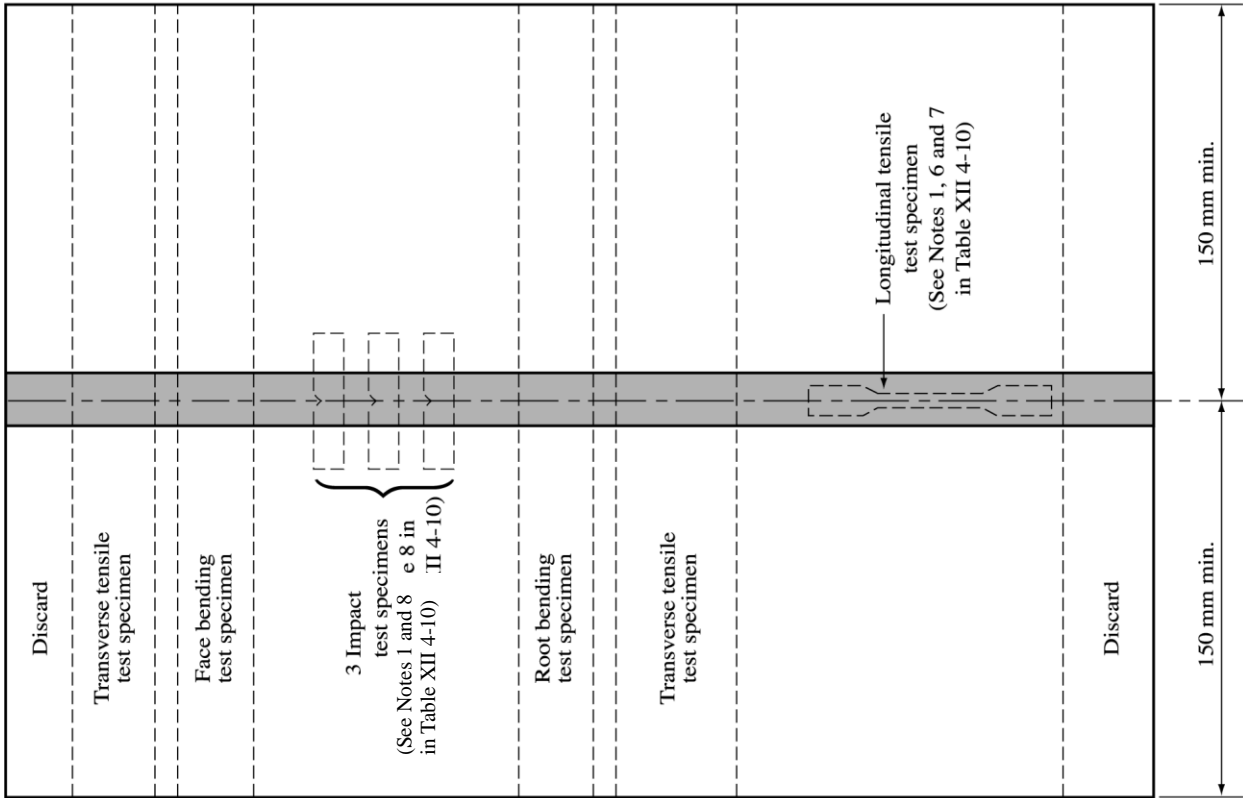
Butt Weld Test Assembly for Automatic Two-run Technique Welding Materials
